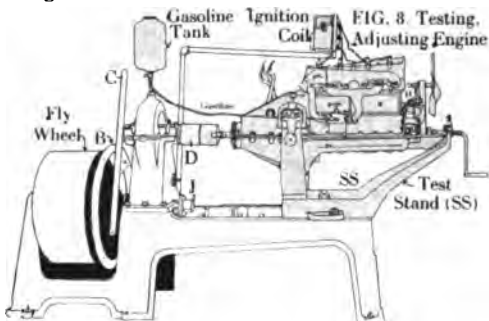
Fairbanks Machine being used for Testing, Adjusting and Inspecting Engine under its own power, before installing in car. Note the stand (SS) has been attached to machine for this purpose.
